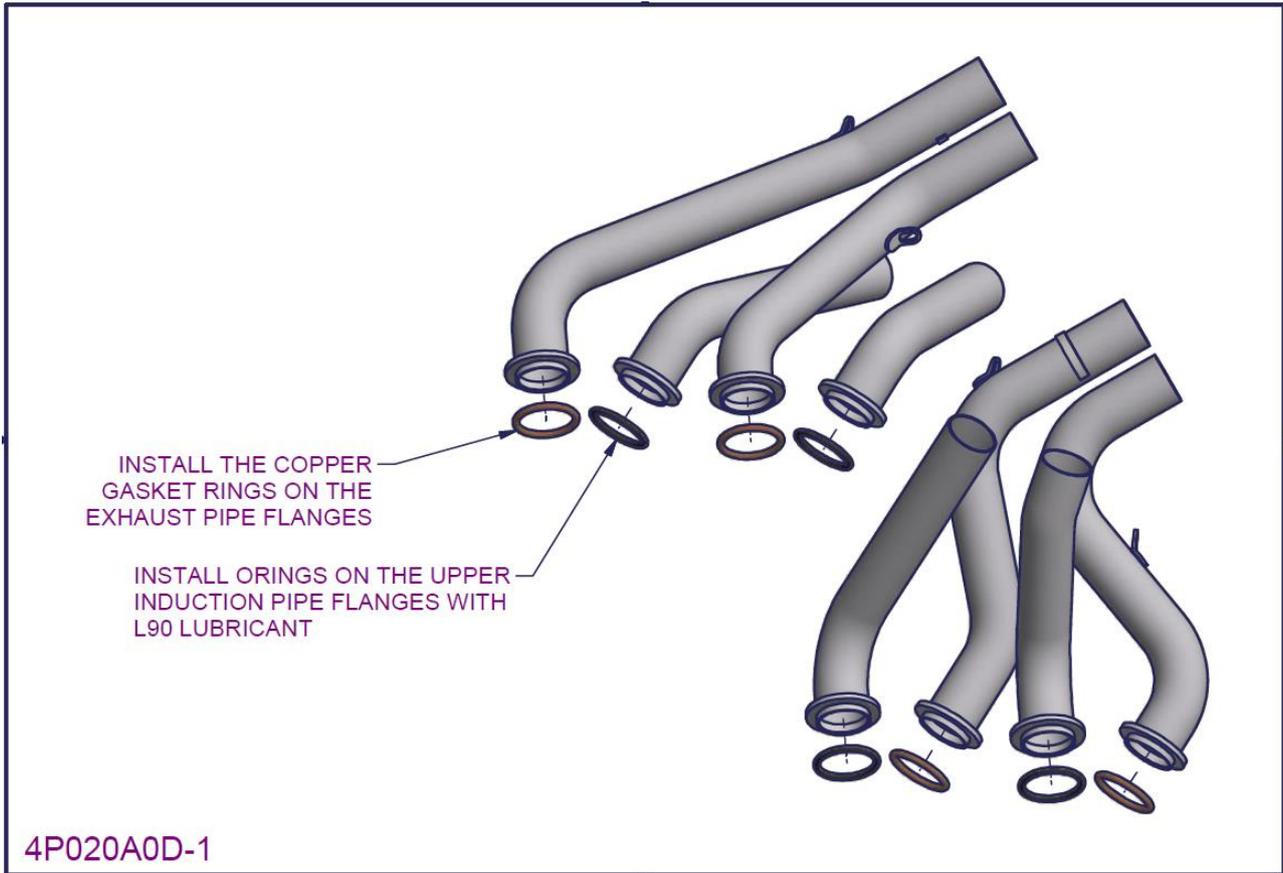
2200/3300 Exhaust and induction pipe installation 1
